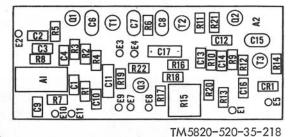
Printed circuit board 1A9A2, parts location diagram.
